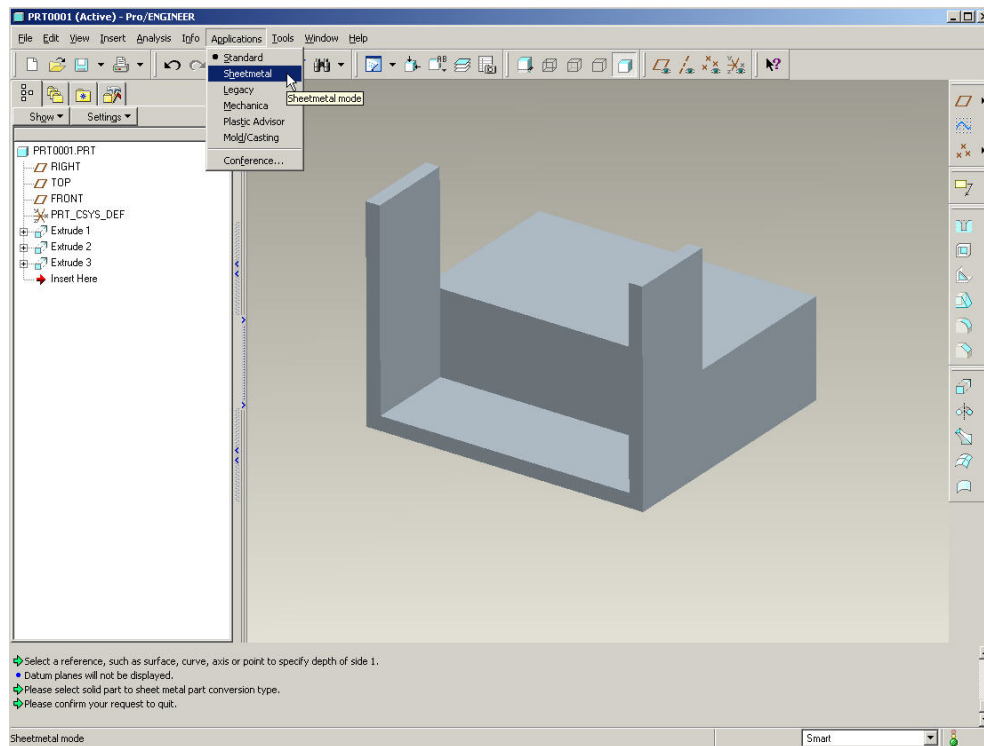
Geometry Created in Standard Pro/Engineer to be Imported Into Sheetmetal
